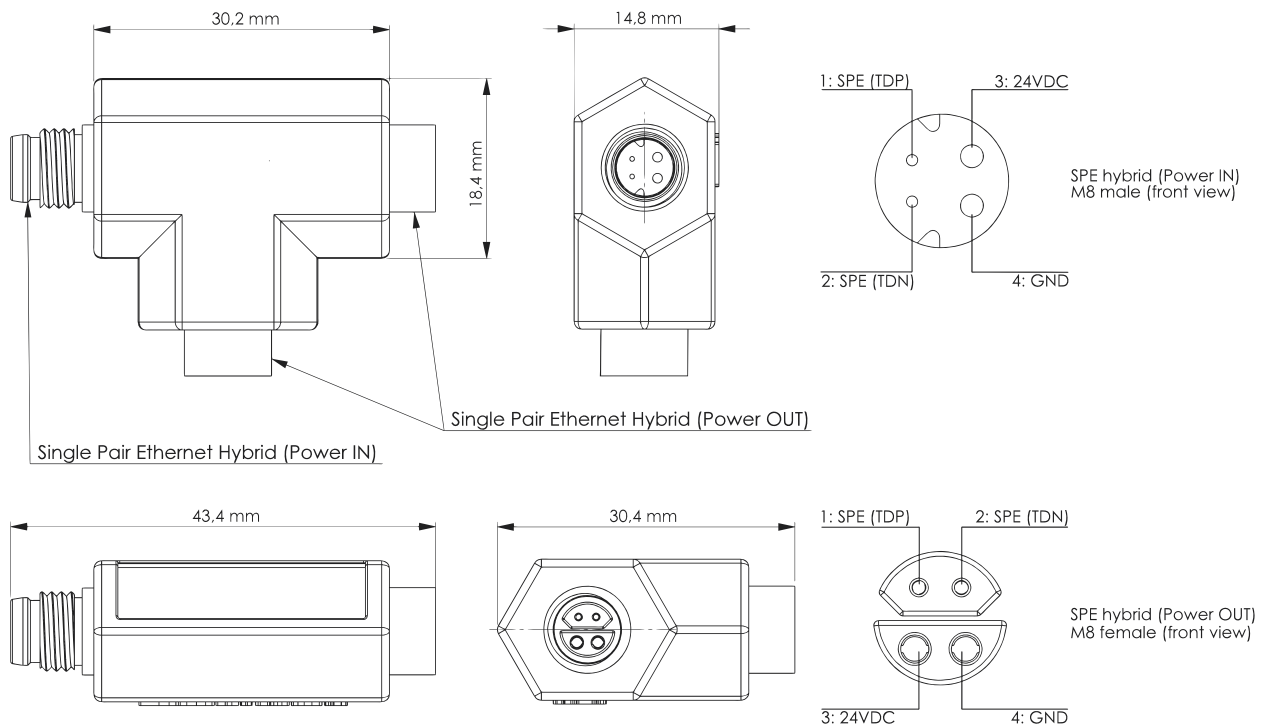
periSWITCH 3-port dimensional drawing & pinout
